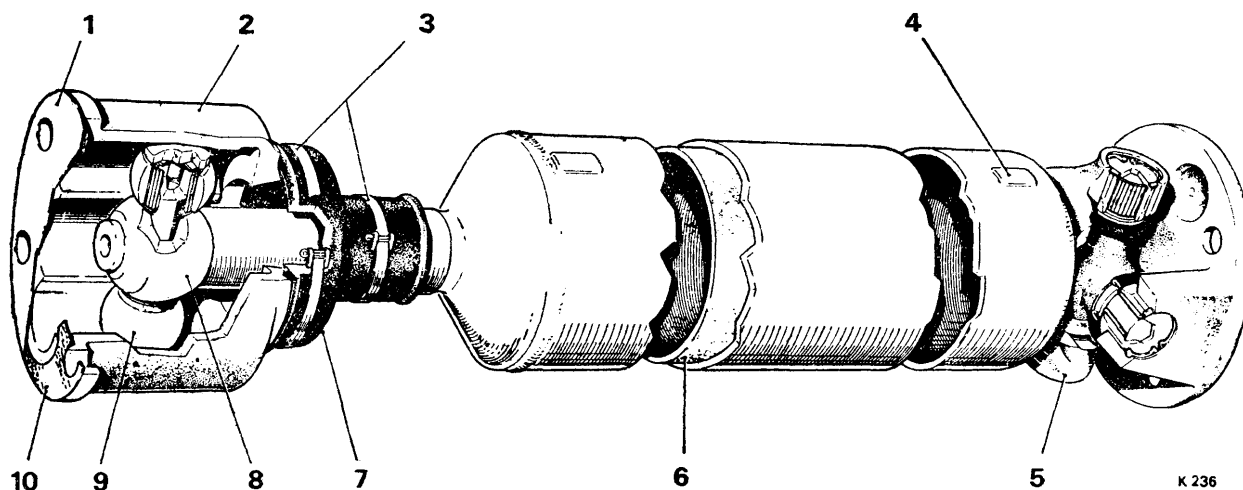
PROPELLER SHAFT—FOUR SPEED AUTOMATIC GEARBOX
